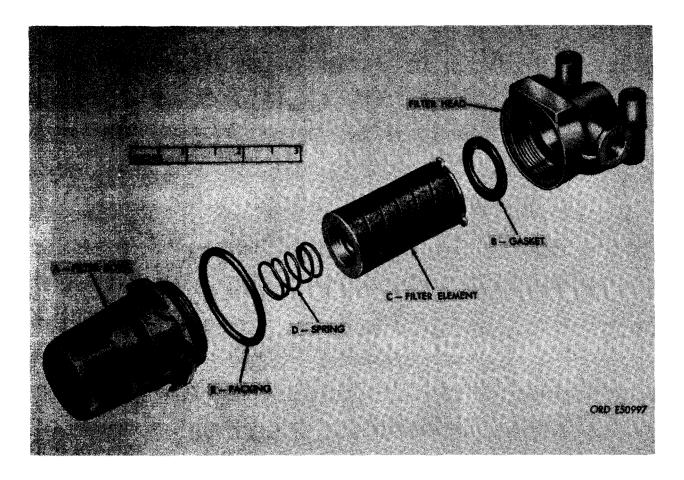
FLAME HEATER FUEL FILTER - EXPLODED VIEW.
